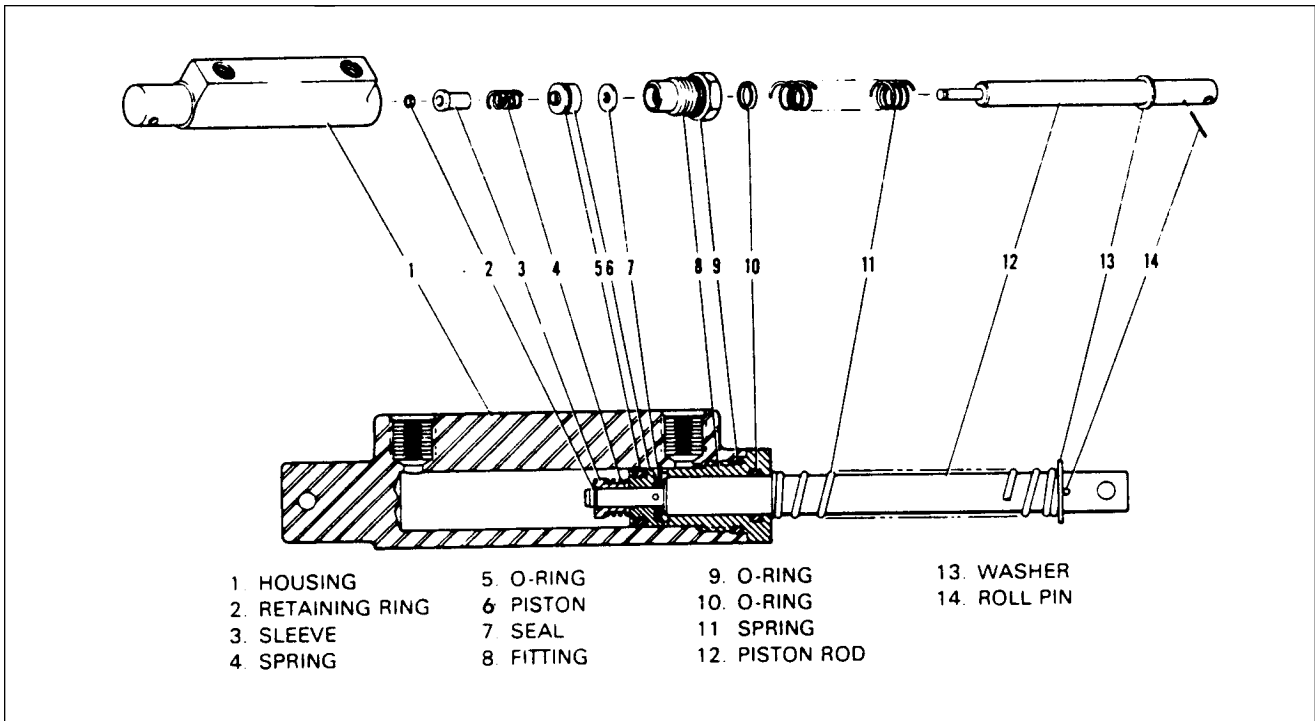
Brake Cylinder (17000) (Toe Brake)
